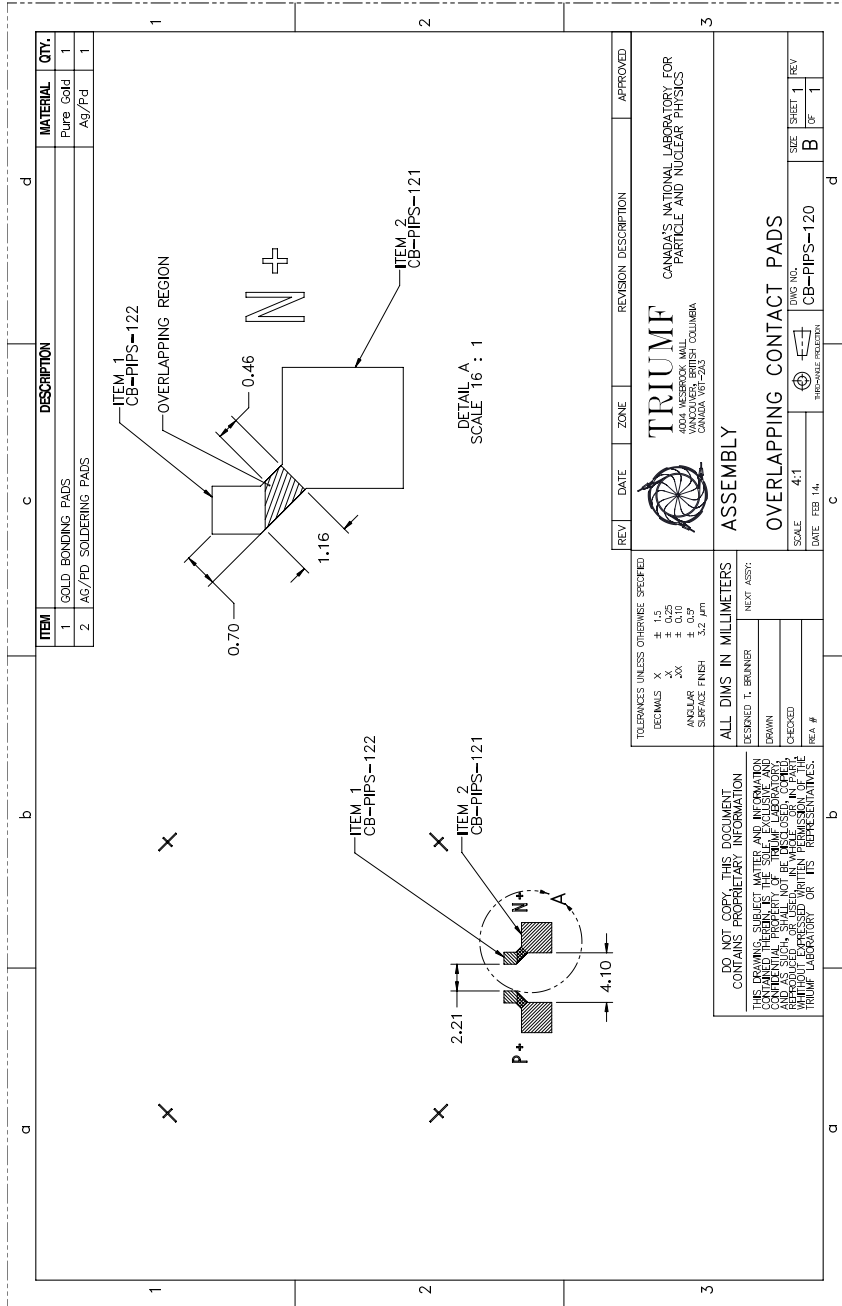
Drawing of contacts for a 600 mm² PIPS detector.
